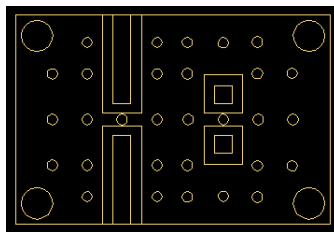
Cleaning the PCB Surface Where the DL2 is Soldered
